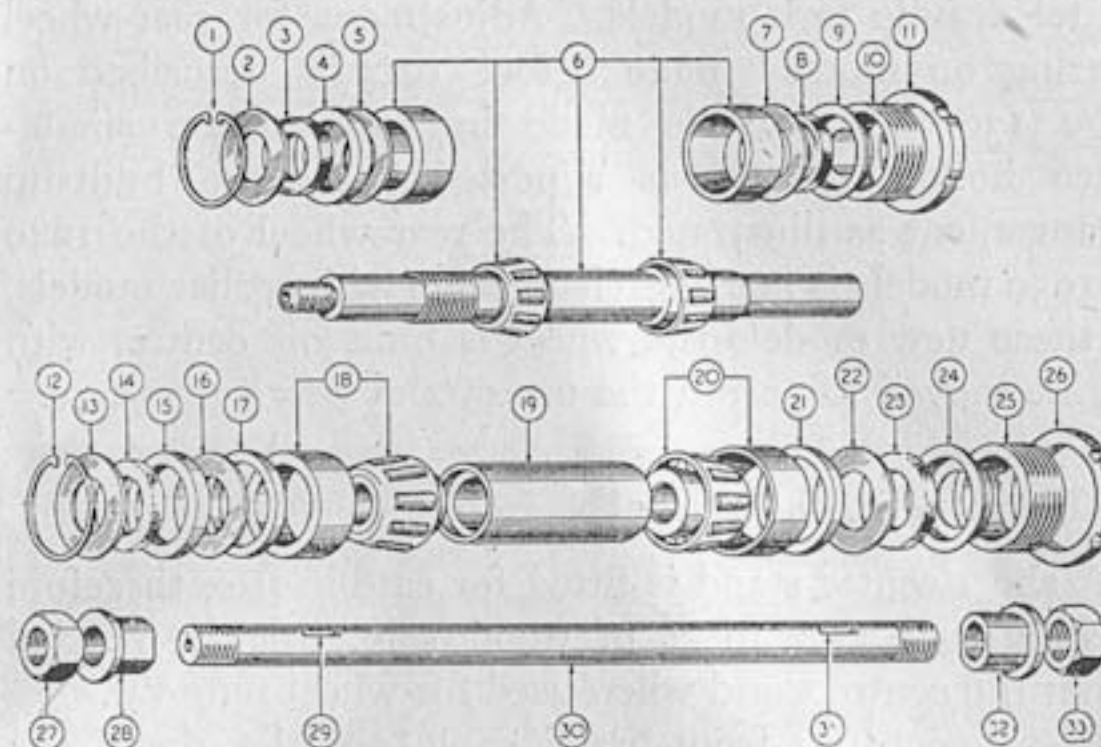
EXPLODED VIEW OF HUB BEARING COMPONENTS IN THE ORDER OF ASSEMBLY.
